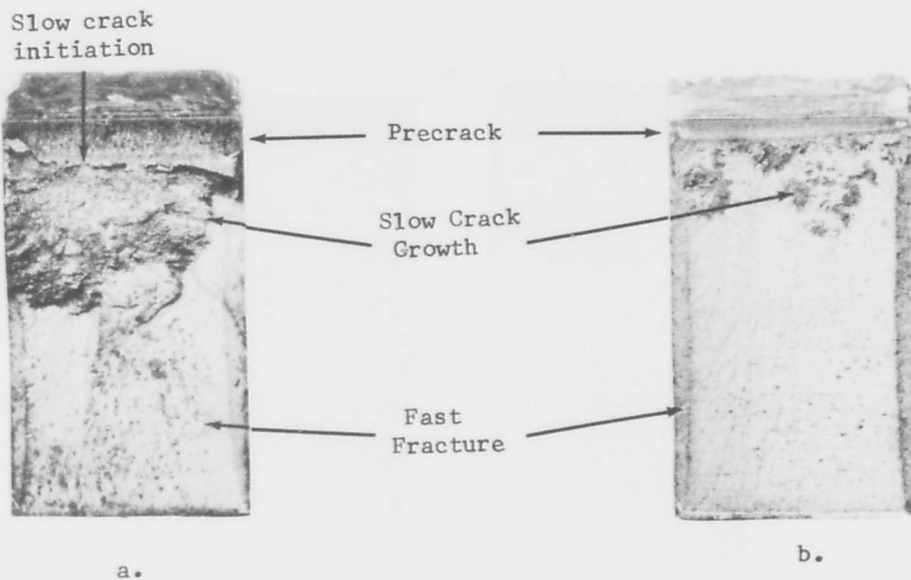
Delayed Failure of HP 9-4-45 Steel (242 Ksi Strength Level) Cantilever Loaded Notch Bend Specimens.
